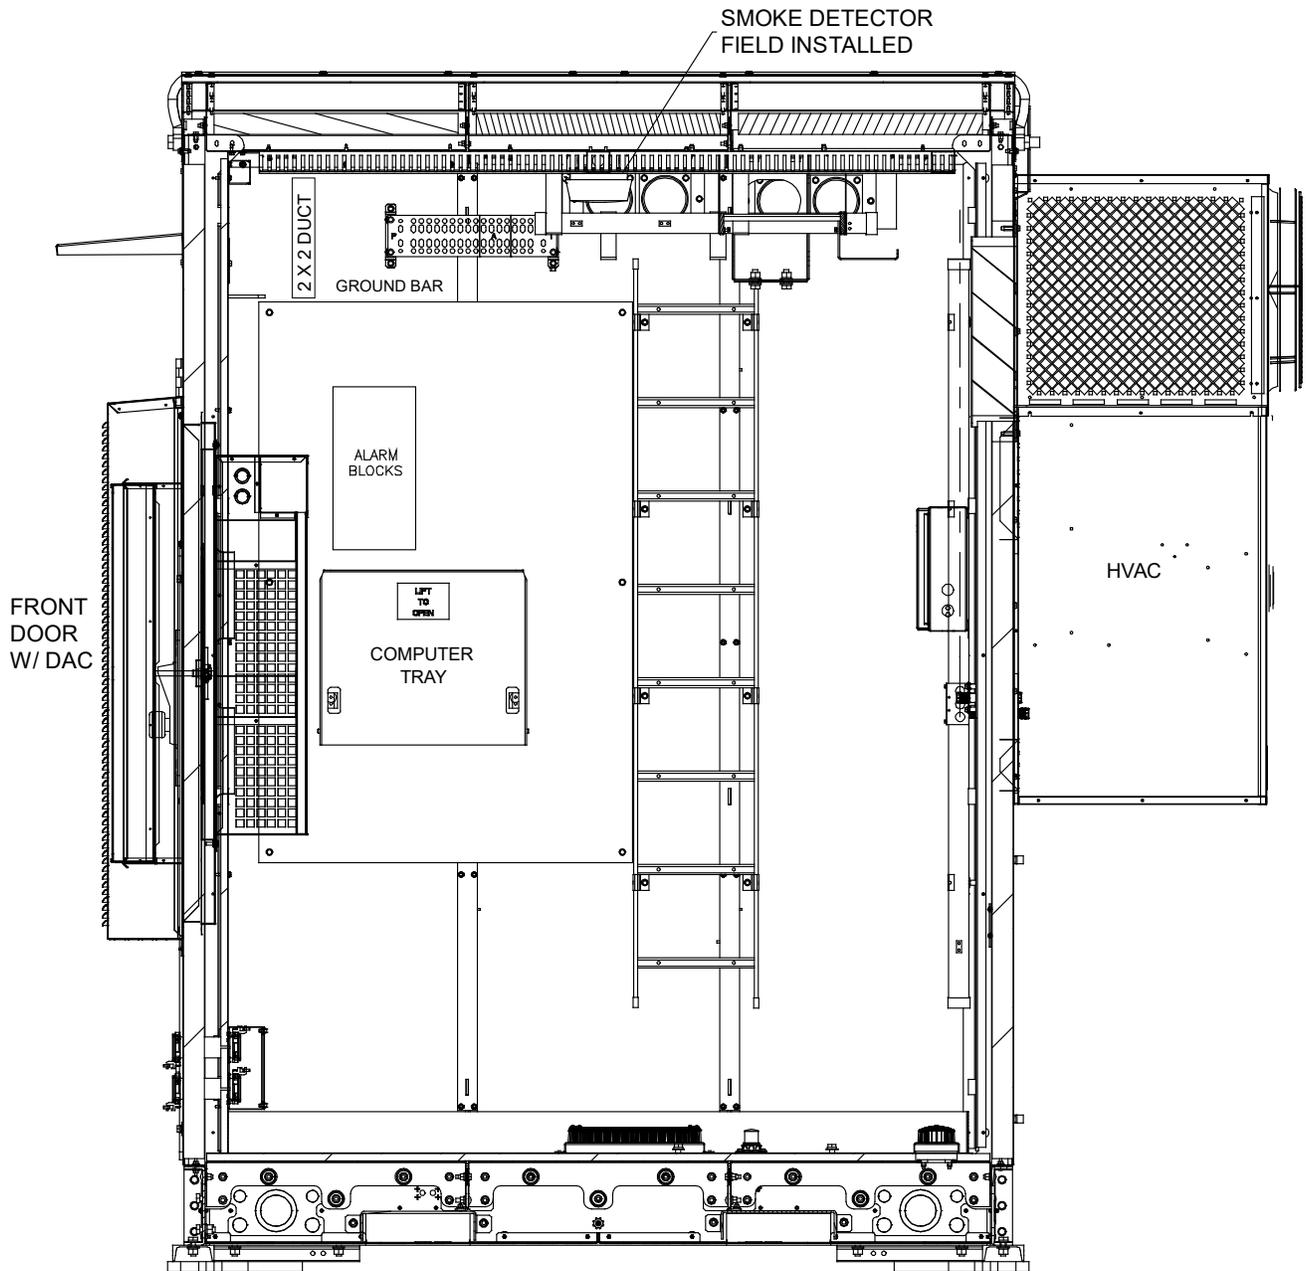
WIC Wall Detail Views (cont'd from previous page)
